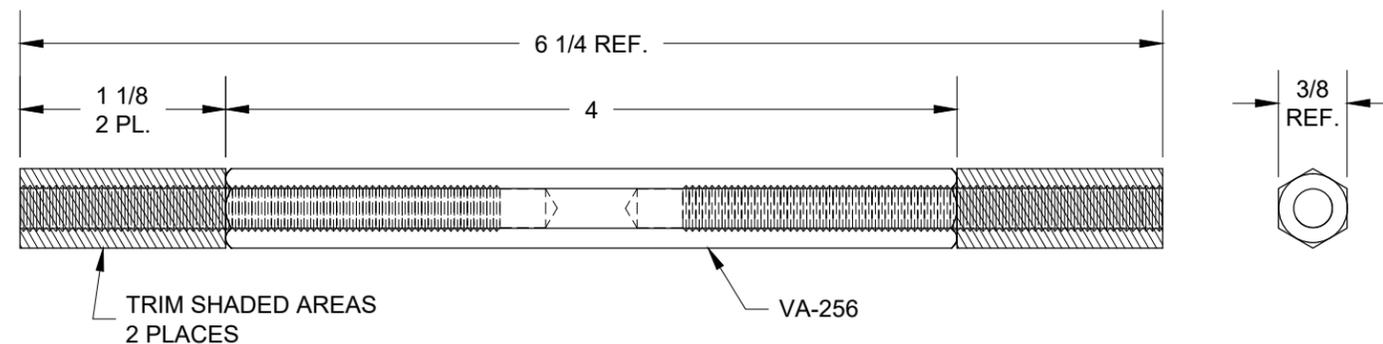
CUT FLAP PUSHROD TO LENGTH
